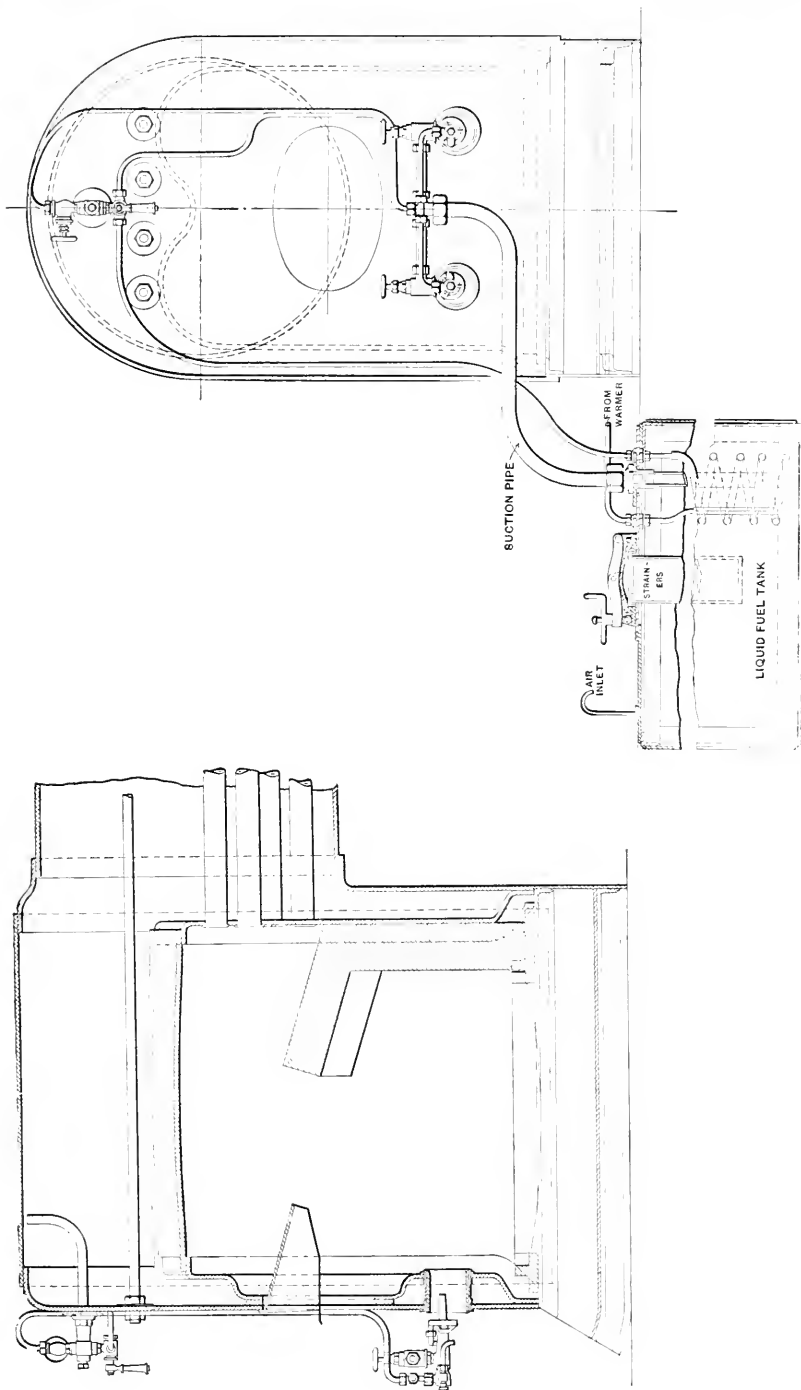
A SECTIONAL VIEW OF FIG. 1.
